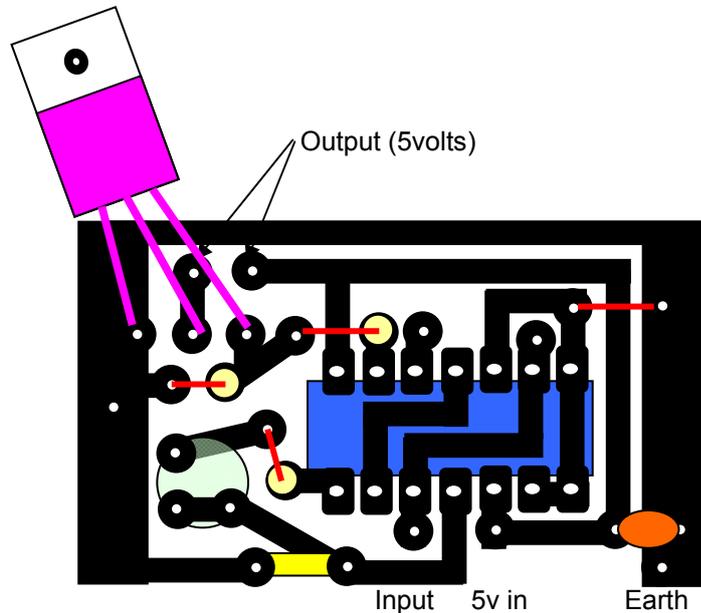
Switch PCB Component Layout (Scale 2:1) PCB actual size 42 x 24mm see Fig 4.
